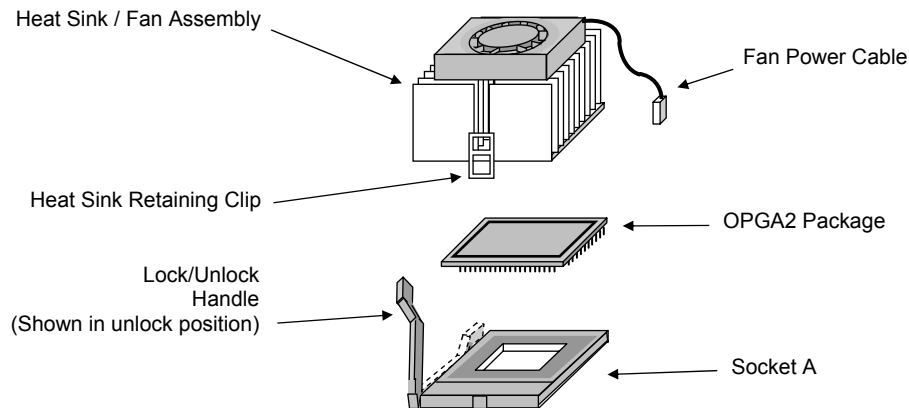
Heat Sink, Processor, and Socket Assemblies
